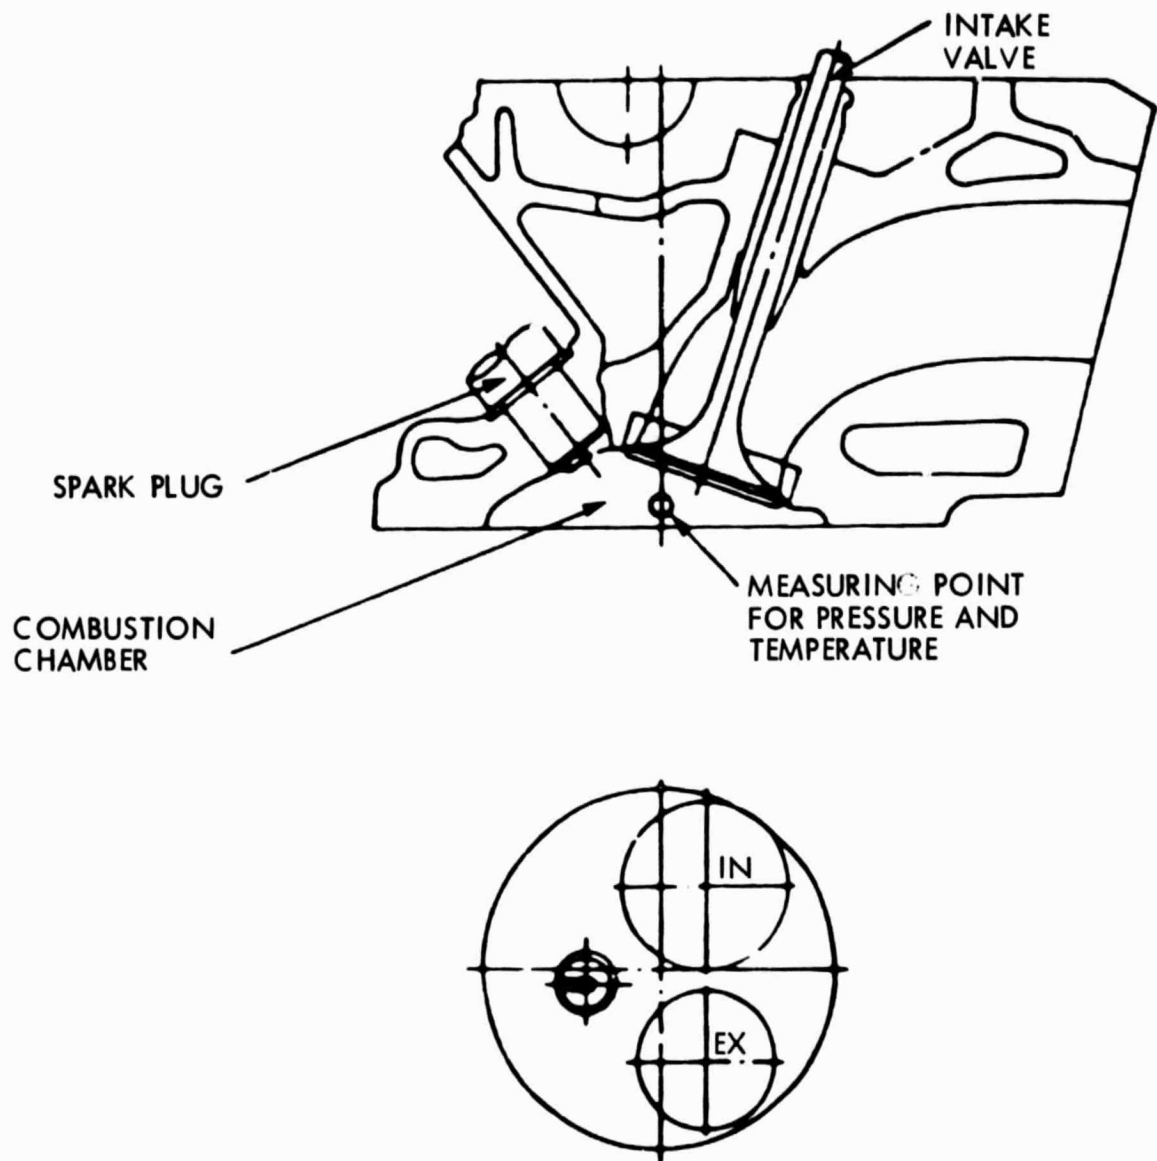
Cross-Section of the Conventional Engine Cylinder Head (Ref. 57)
